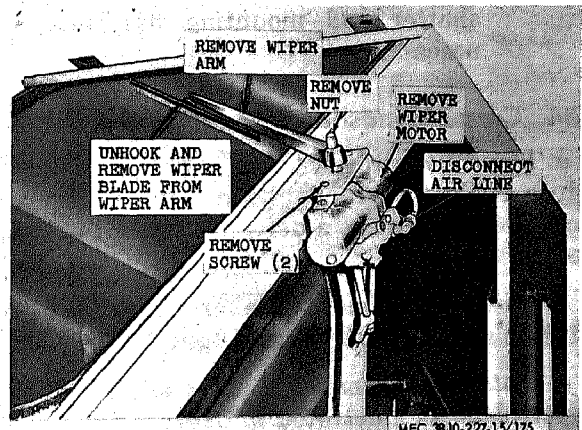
Crane Windshield wiper motor, and blade, removal and installation.
